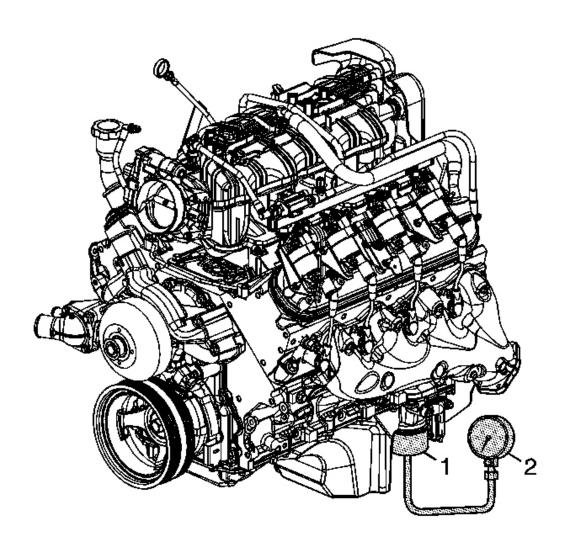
View Of Special Tools Oil Pressure Gage & Adapter Courtesy of GENERAL MOTORS CORP.
